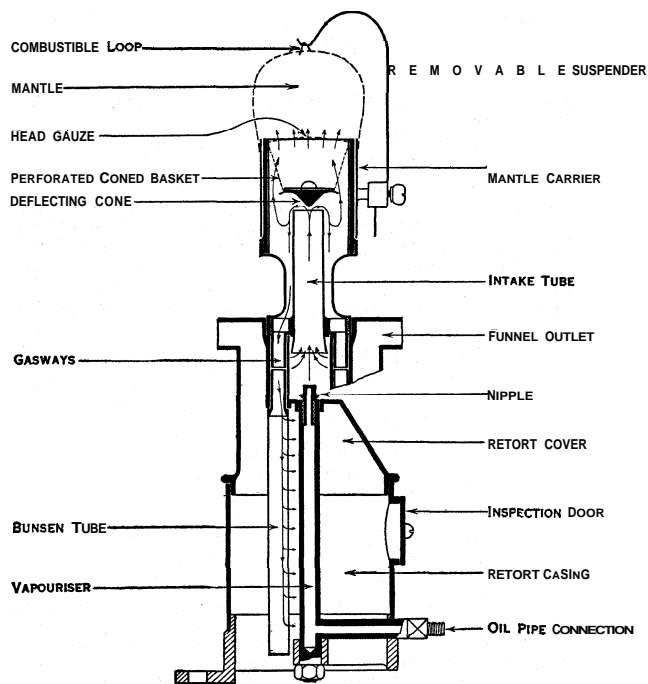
HOOD-PETROLEUM-VAPOUR BURNER
